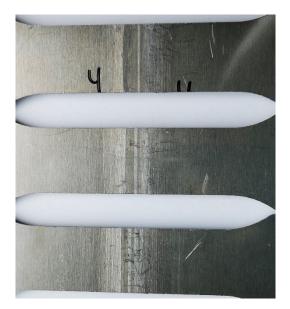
b) showing the failure area from tensile testing. Specimen I failed in the wormhole/pore like defect due to lack of filling and incomplete shoulder depth. Specimen III and IV failed in the weld area in between the TMAZ/HAZ.
